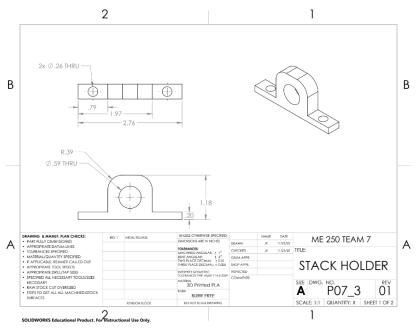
Engineering drawing for the 3D printed PZT stack holder.
